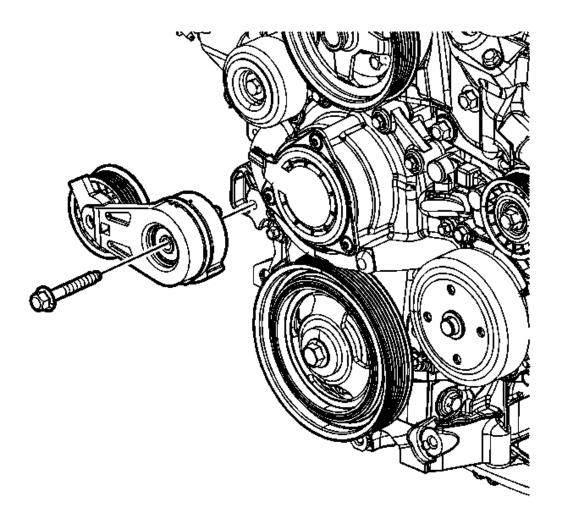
Identifying Drive Belt Tensioner & Bolt Courtesy of GENERAL MOTORS CORP.
